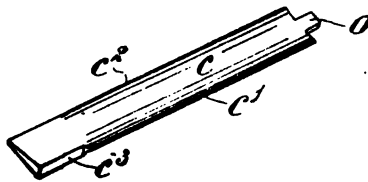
C^1 is inlet edge, C^2 is outlet edge.
